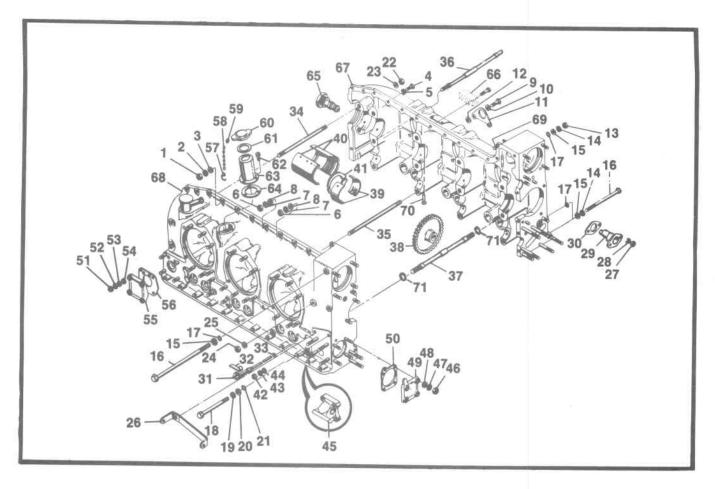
A. CRANKCASE ASSEMBLY.
